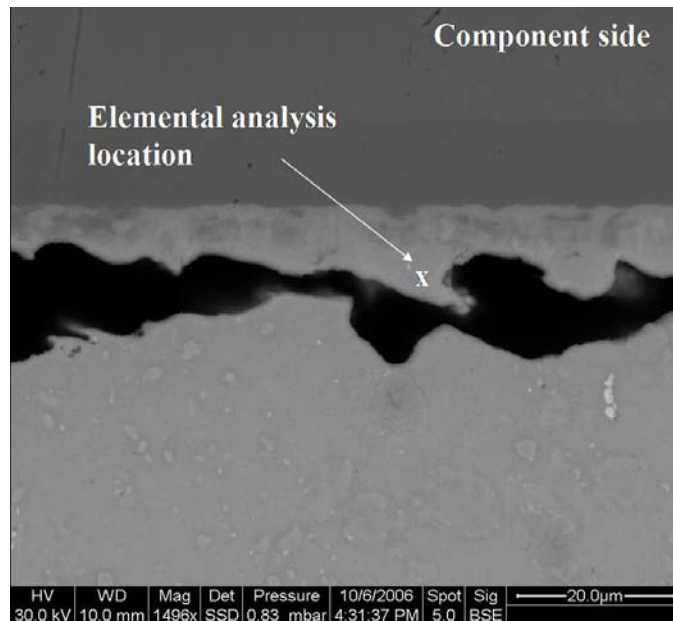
BGA (SnAgCu) on HASL finish. Repaired by replacing BGA (tin-lead) with BGA (SnAgCu) on HASL (tin-lead) board. Failure location was seen in the bulk solder on component side
